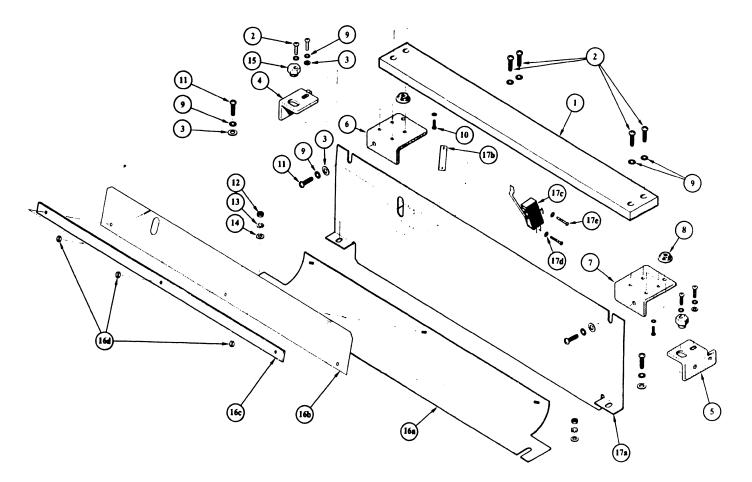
LOWER PAPER GUIDE ASSEMBLY
